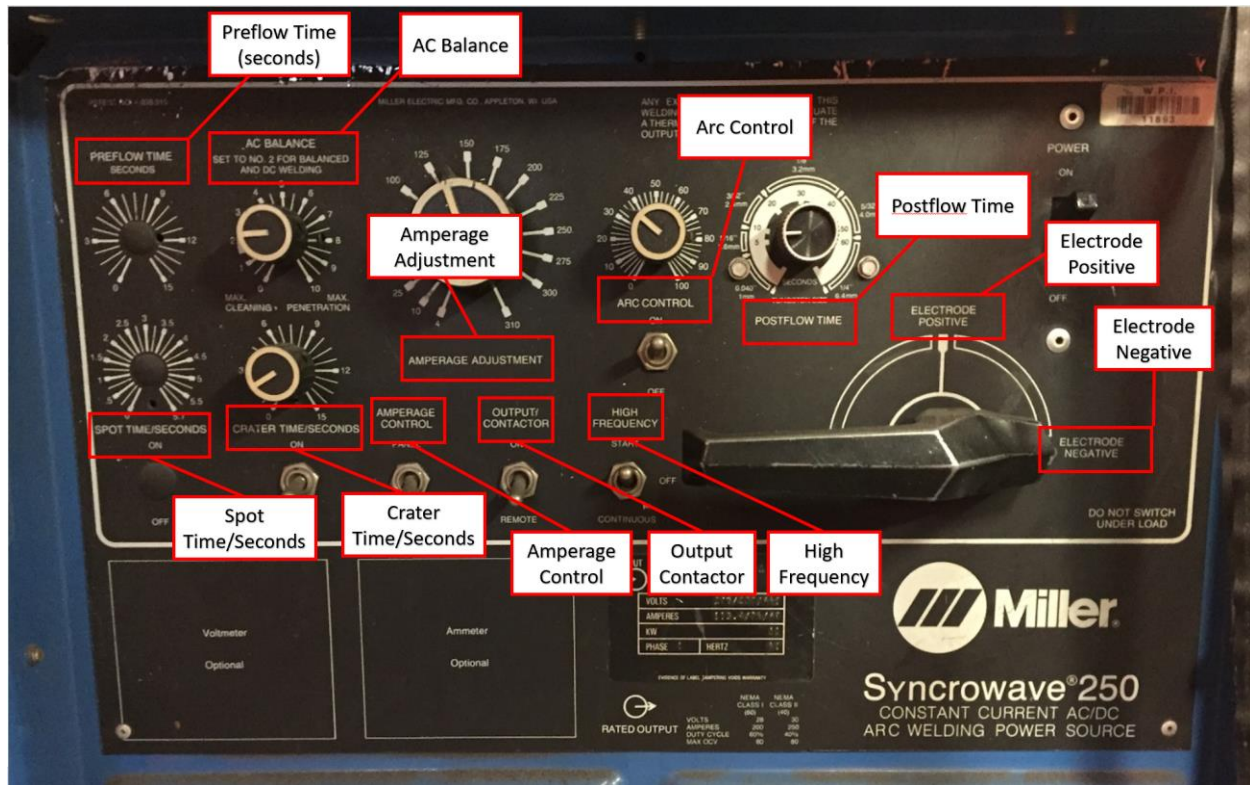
Miller TIG Welder Controls for Adjusting Weld Settings
